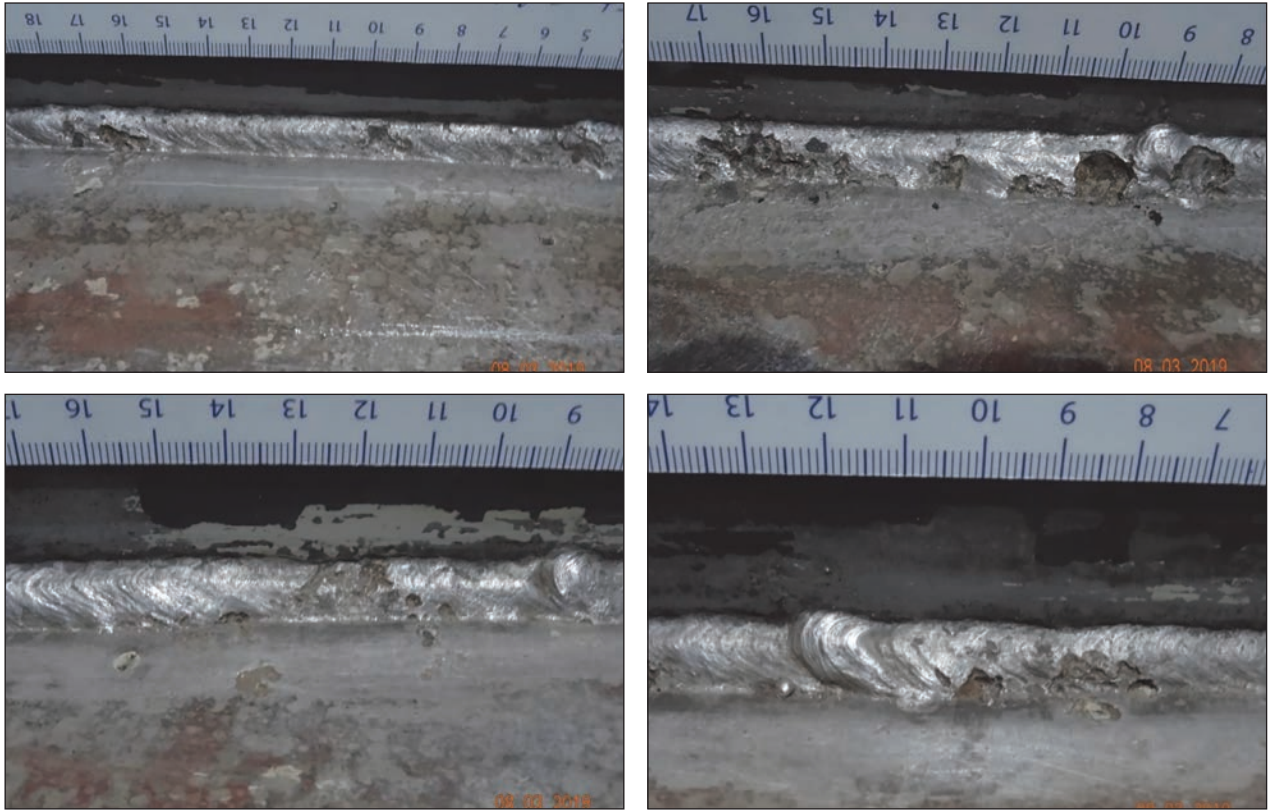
General view of corrosion damage of welded joints at the tank's bottom
